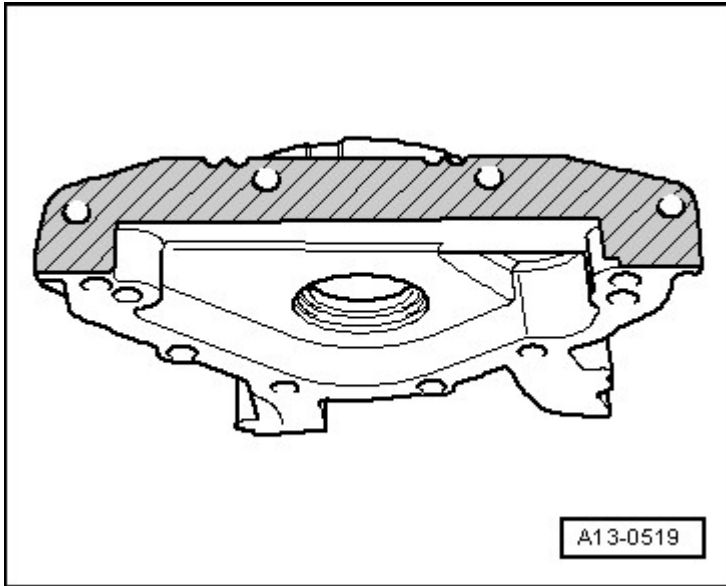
Lightly Coating Lower Sealing Surface Of Sealing Flange With Sealant
